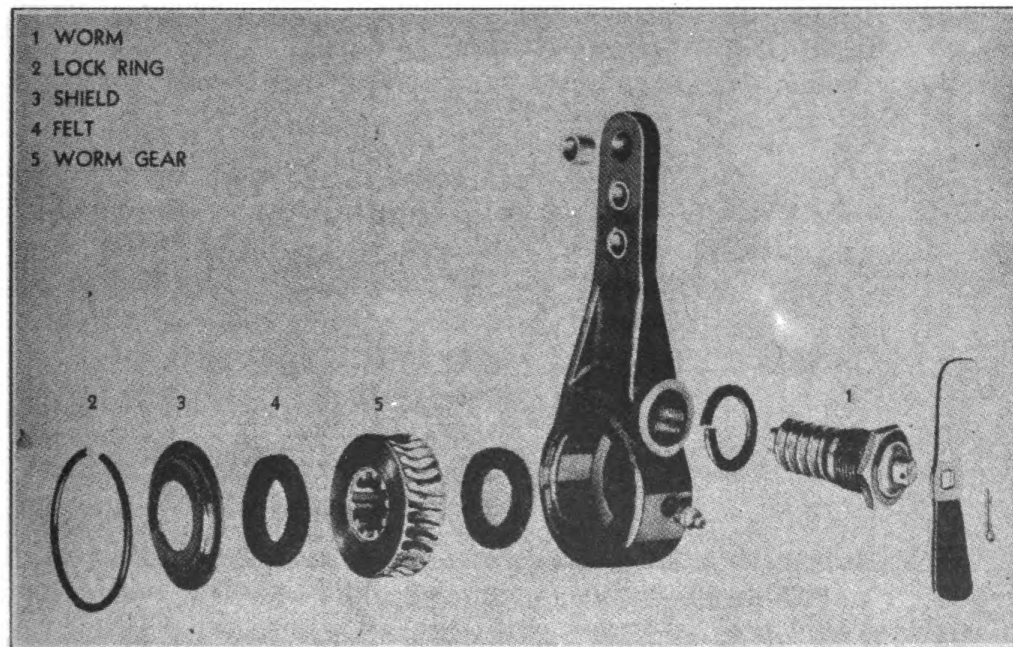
SLACK ADJUSTER ASSEMBLY
